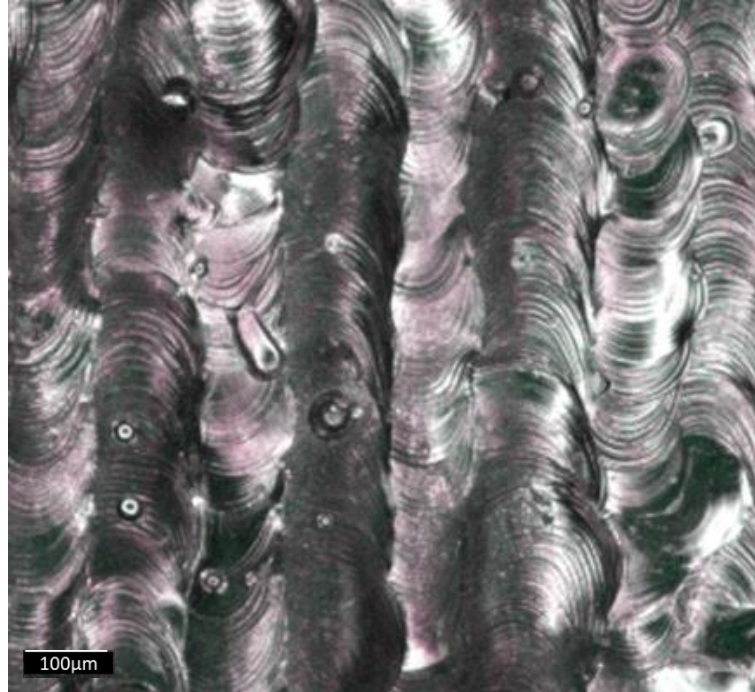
Layer formation at a laser power of 80W, showing reduced levels of surface defects and visible laser scanning tracks. Image taken using Alicona infinite focus optical 3D measuring instrument.
